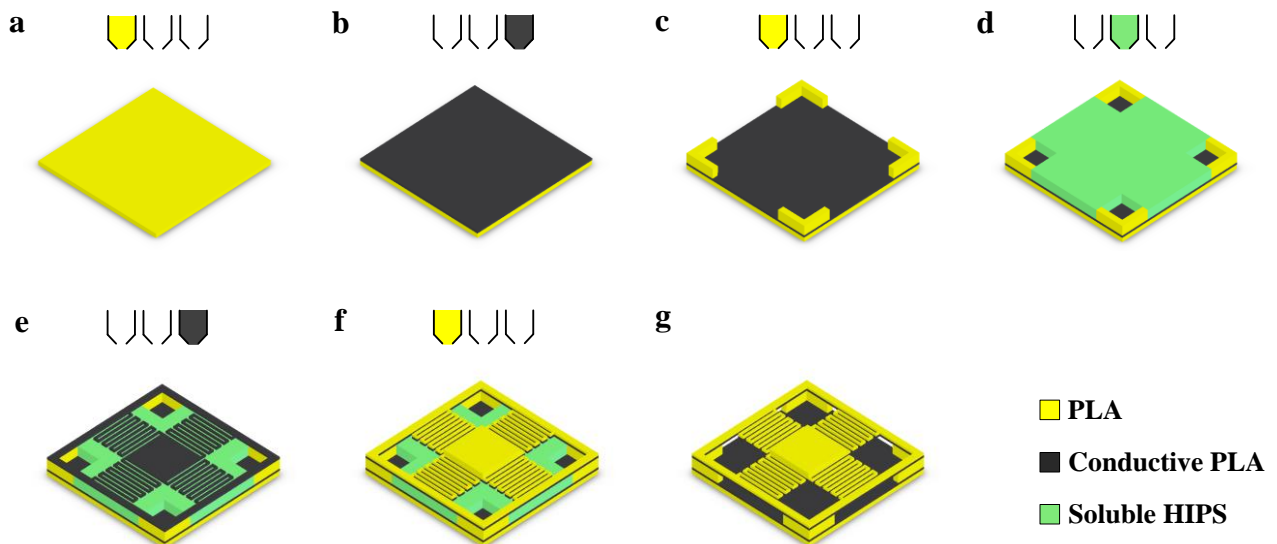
Illustration of the integrative 3D printing process for fabrication of the capacitive force sensor. (a) Bottom plate printing. (b) Bottom electrode printing. (c) Spacer printing. (d) Supporter printing. (e) Top electrode printing. (f) Top plate printing. (g) Removal of the HIPS supporter by D-Limonene.
